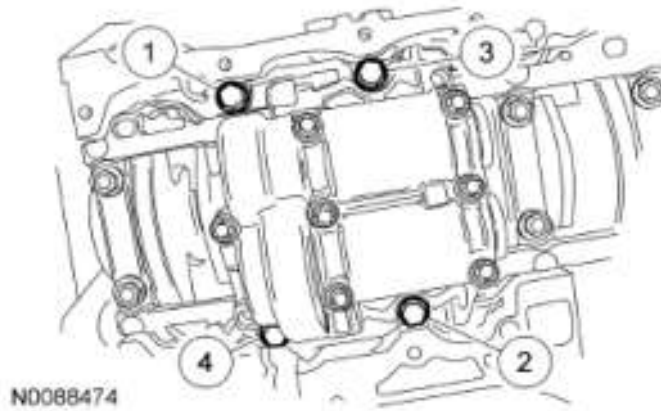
Balancer Unit Mounting Bolts Tightening Sequence
